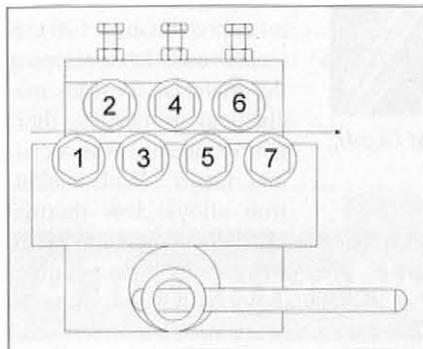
Straightening unit ER 7-3 (Illustration reference: Witels Apparate-Maschinen Albert GmbH & Co. KG, D-12277 Berlin)
